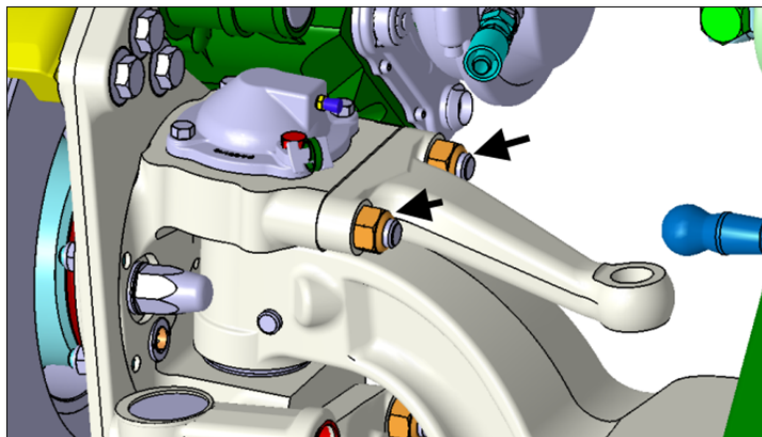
UNSCREW THE STEERING ARM NUTS
